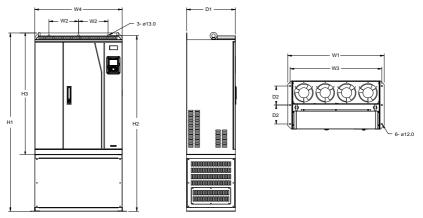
Outline and mounting dimensions of 660V 400–630kW VFD models
